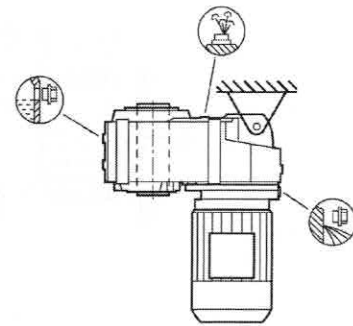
Mounting positions for parallel shaft gearbox F.AD shaft-mounted design, size 29
